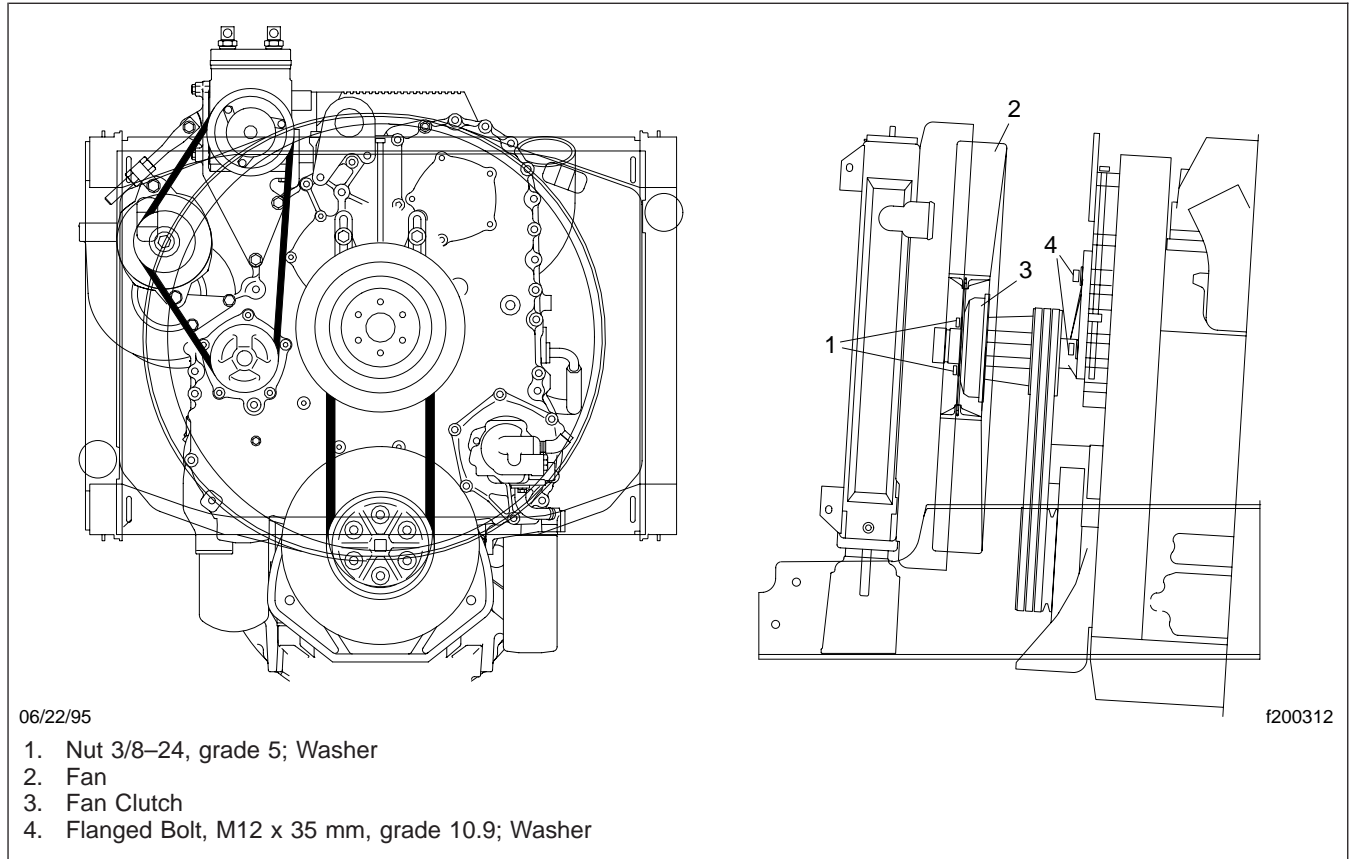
, Kysor Fan Clutch (Detroit Diesel Series 60 engine)
